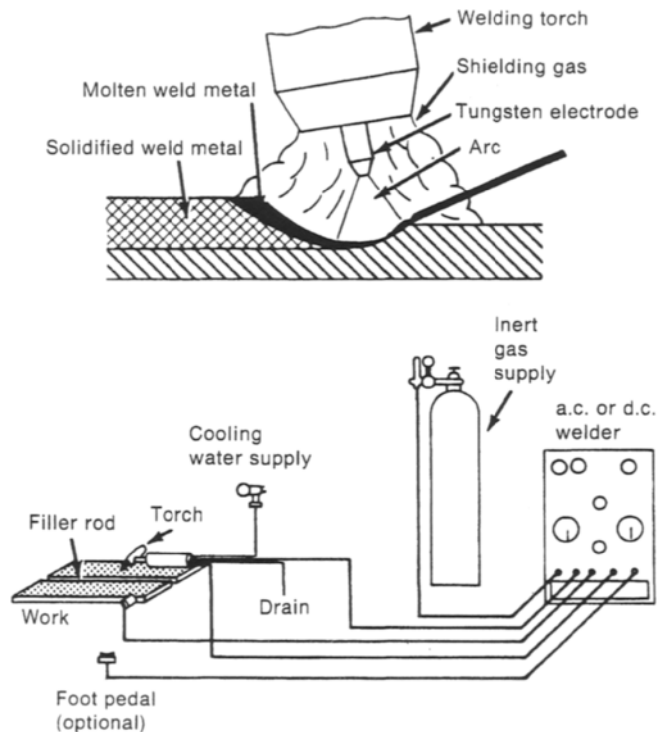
Diagram and equipment arrangement for tungsten inert gas welding. (Reproduced with permission of Nickel Development Institute publication 9002; *Welding of Stainless Steel and Other Joining Methods*.)
